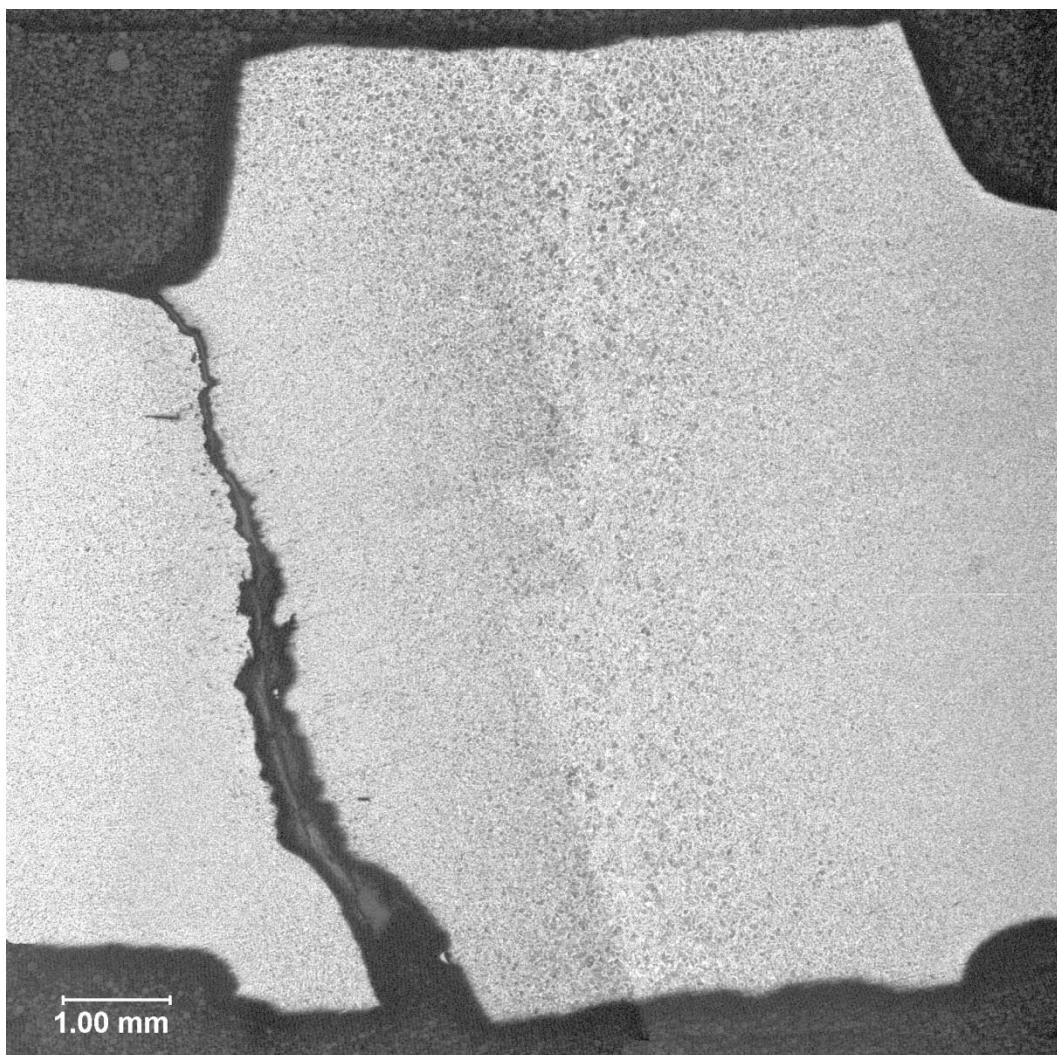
Metallographic section across the weld showing the various stages of cracking
